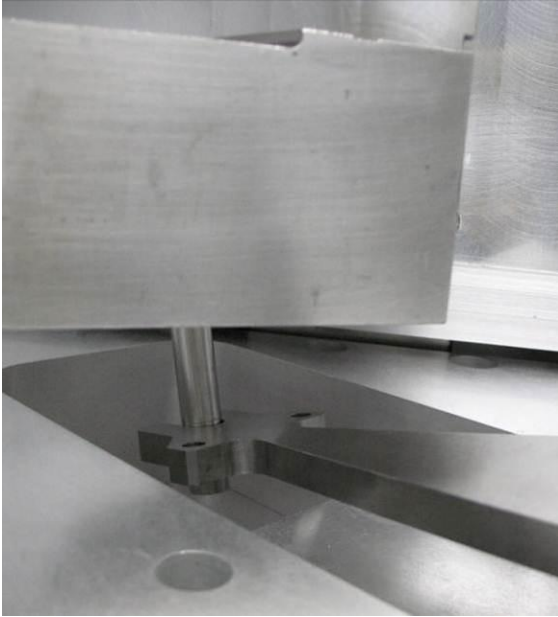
Alignment Rod in end of D0902502 Stage 1-2 Blade Spring and D0902276 Stage 1 Flexure Rod Bracket
